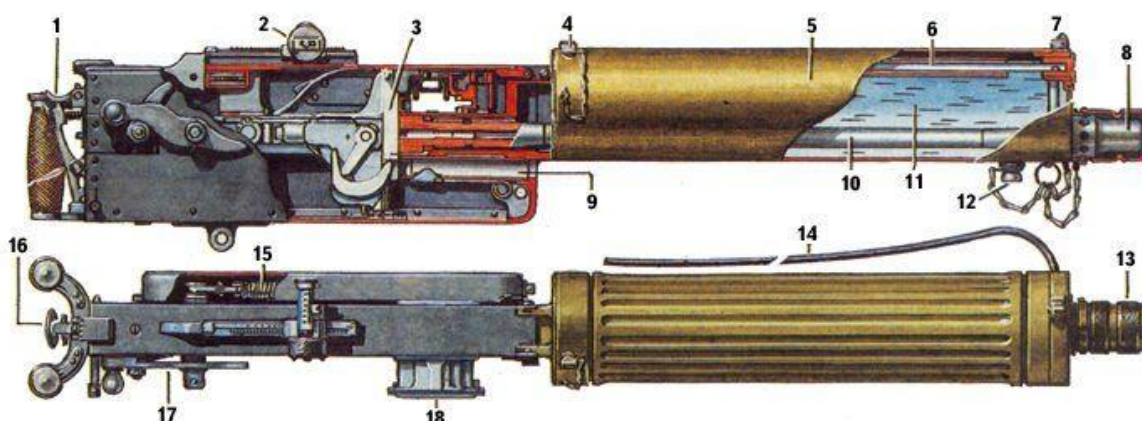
The inside of a Maxim gun, showing the cooling process and the fully automatic mechanism.
